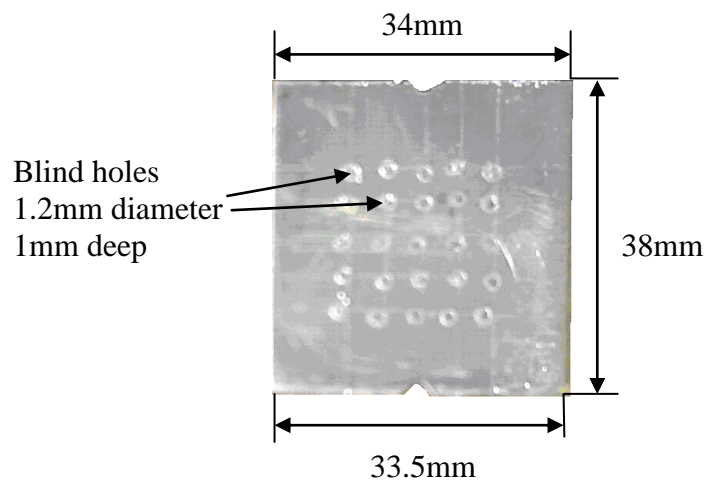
Example 2mm thick plate used to introduce particles into casting.
